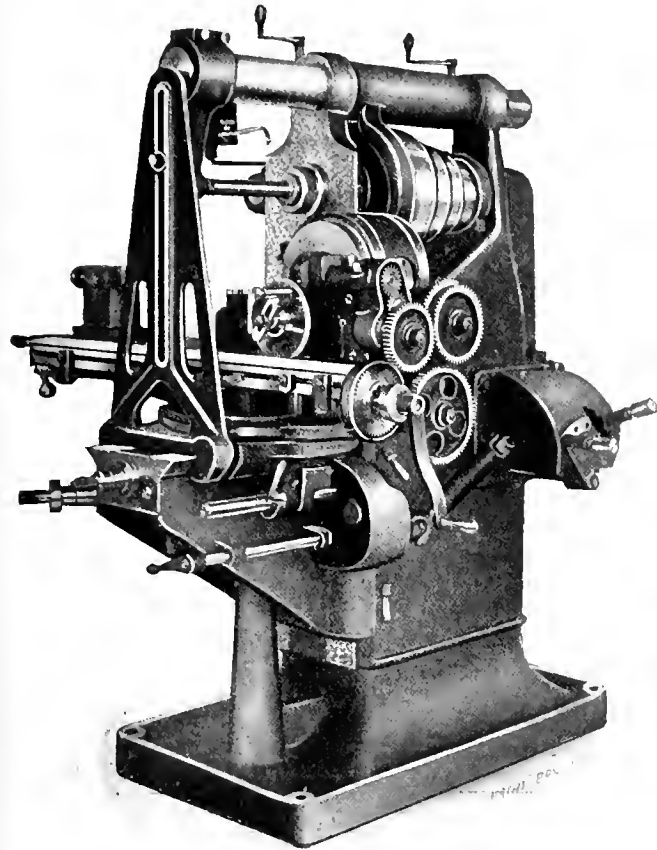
Right-hand Side of Oesterlein Universal Milling Machine, showing the New Feed Box
